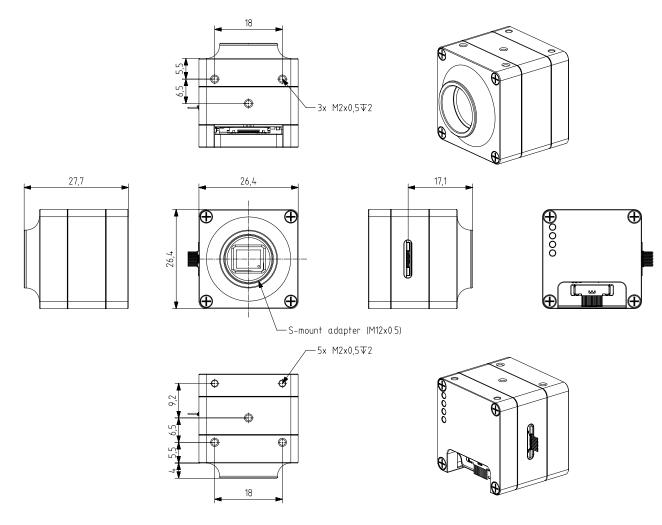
Dimensional drawing of MU003TG-SY-UC-AR
